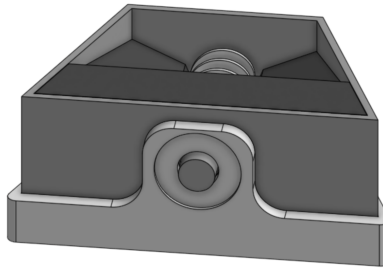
Rear auger end cap glued and inserted into the auger's hex fitting.
